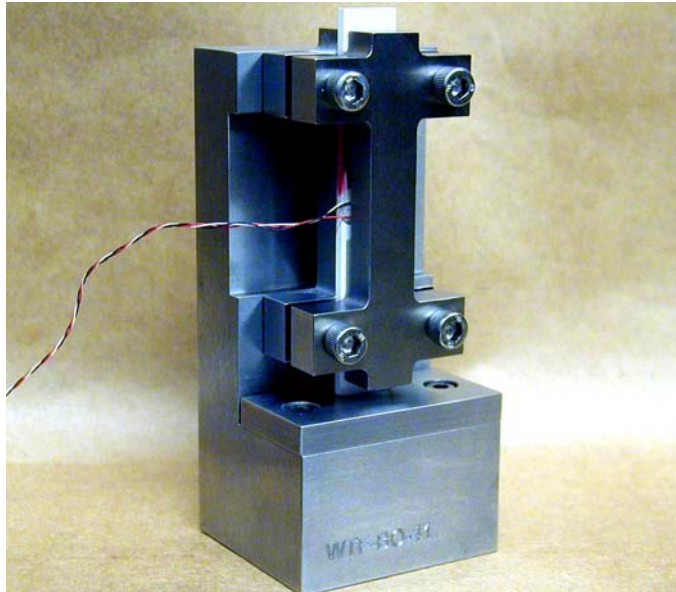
Compression test fixture with a test specimen placed, used in compression testing for Pyroceram at ambient temperature.
